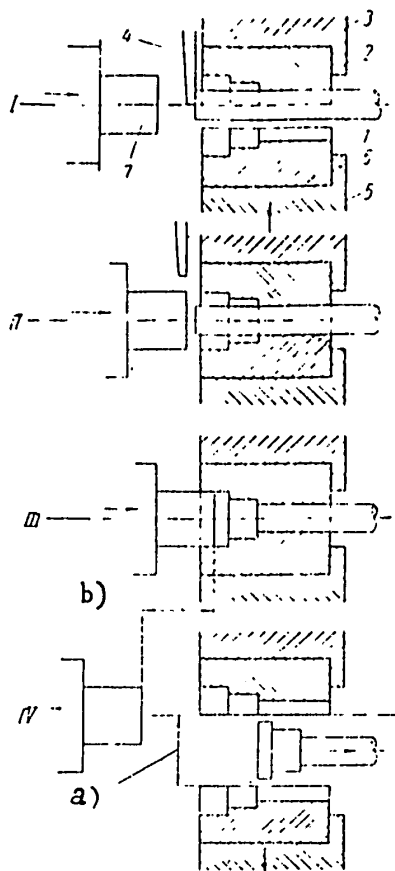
Method of Forging in a Horizontal Forging Machine
